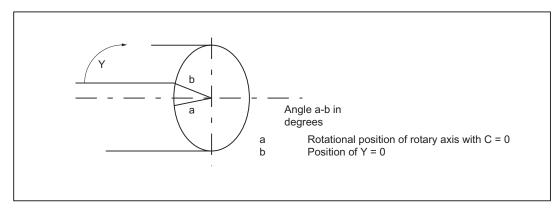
Center of axis rotation in the peripheral cylinder surface
